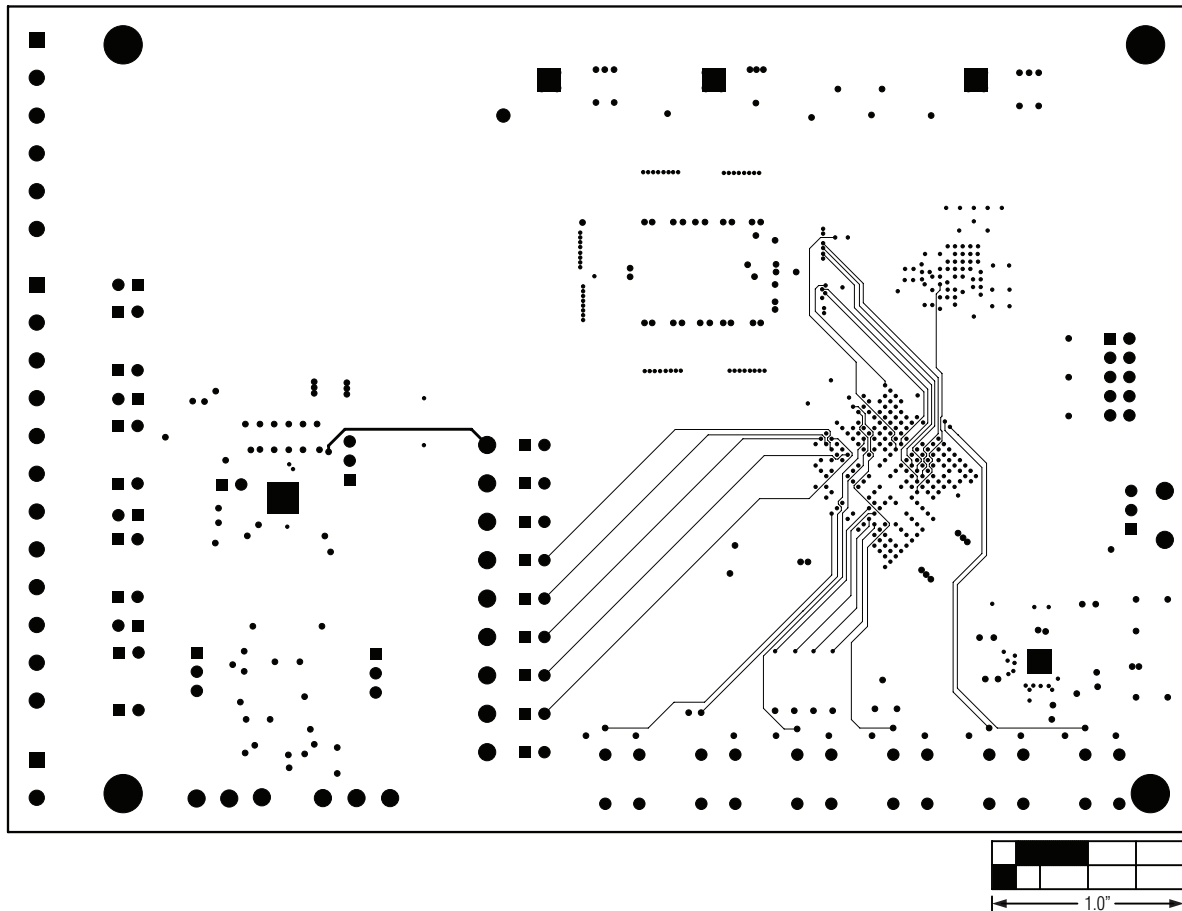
MAX11043 EV Kit PCB Layout—Signal Layer 9
